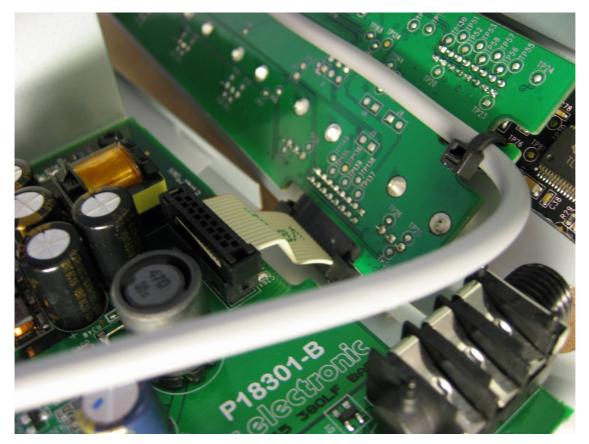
Mount the ribbon cable to the main board as shown in the picture.
